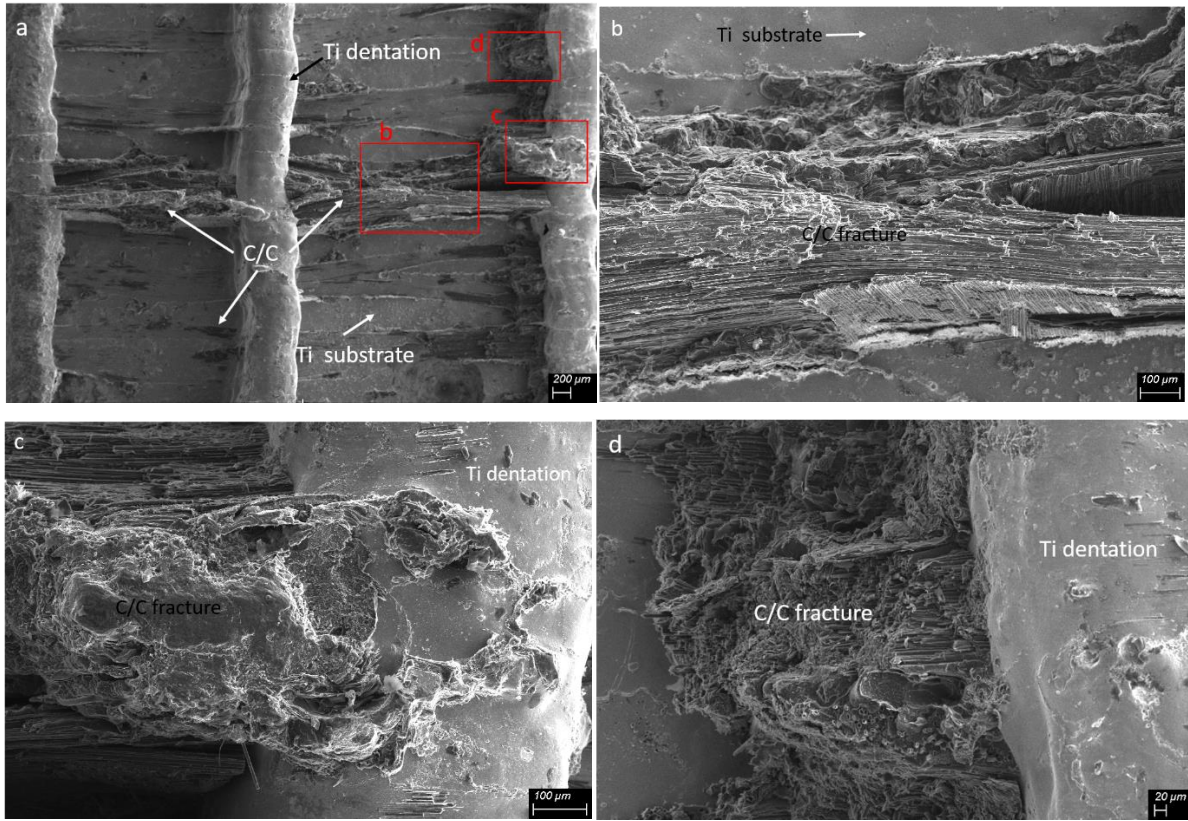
Typical fracture surfaces of the 3D C/C composite-Ti6Al4V joints on the Ti6Al4V sides for the joints with the groove depth of 1 mm.
